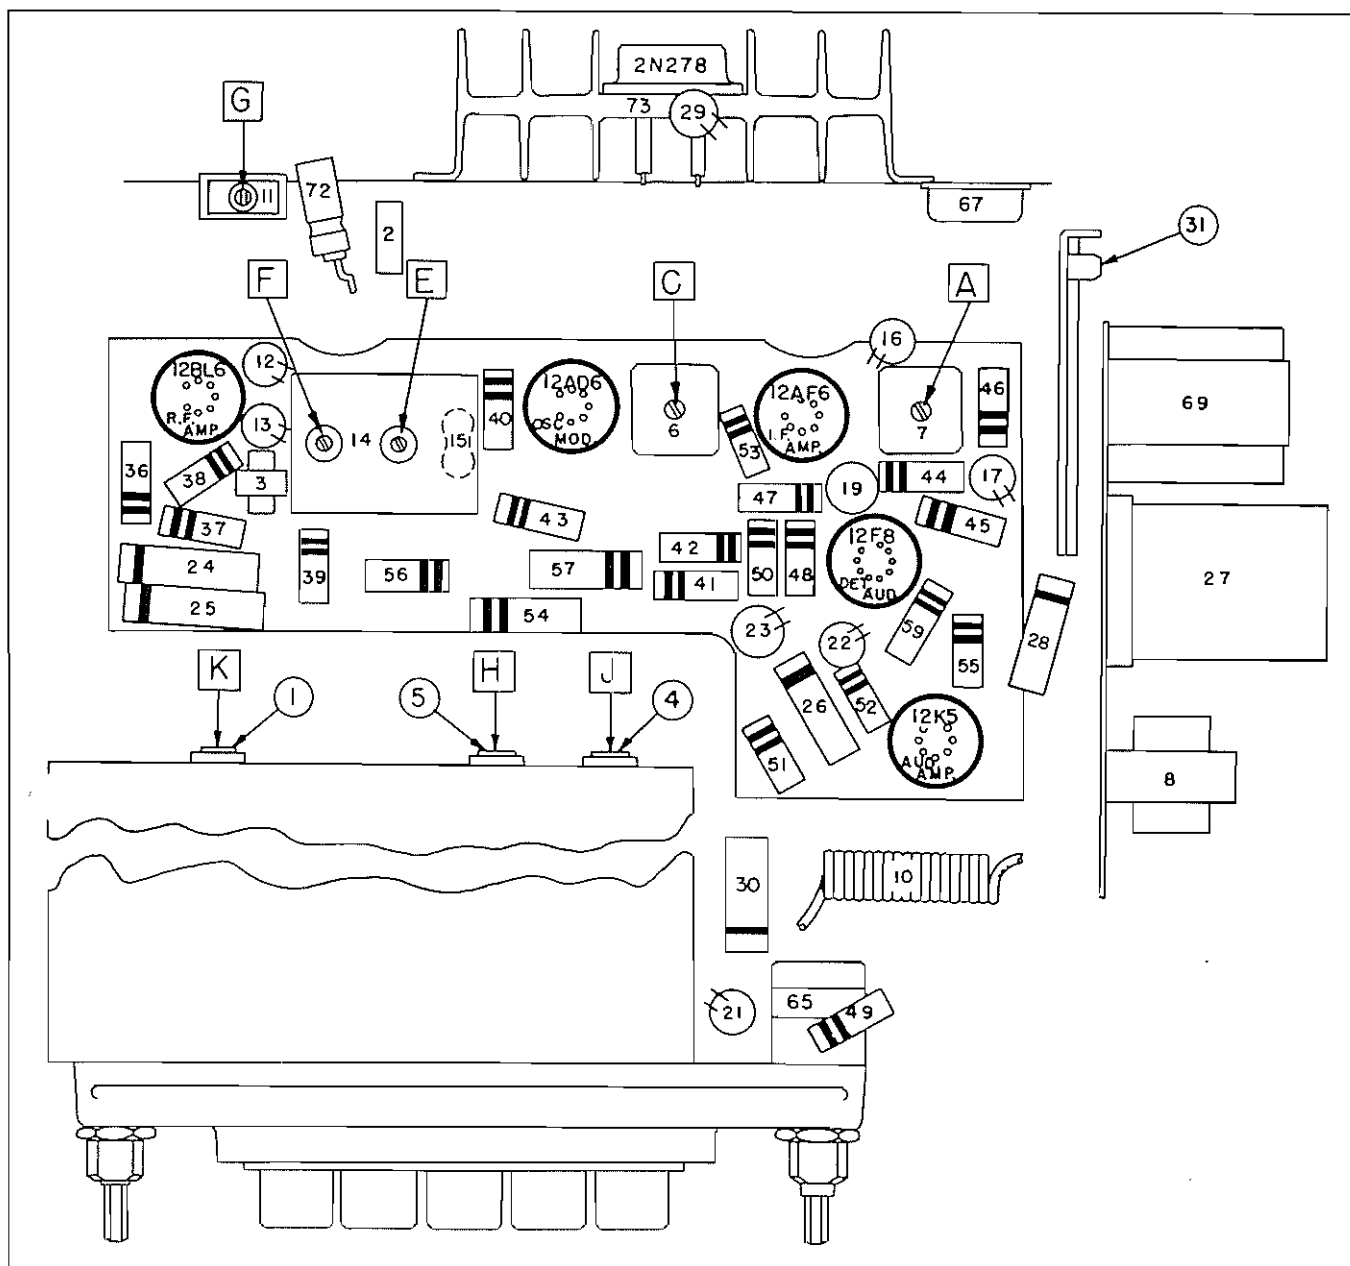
PARTS LAYOUT - TOP VIEW - 987727 - RADIO
